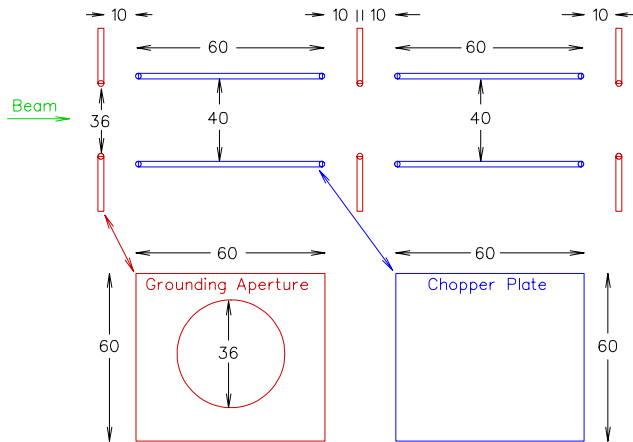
Schematic drawing of chopper plate assembly. Dimensions are in mm.
